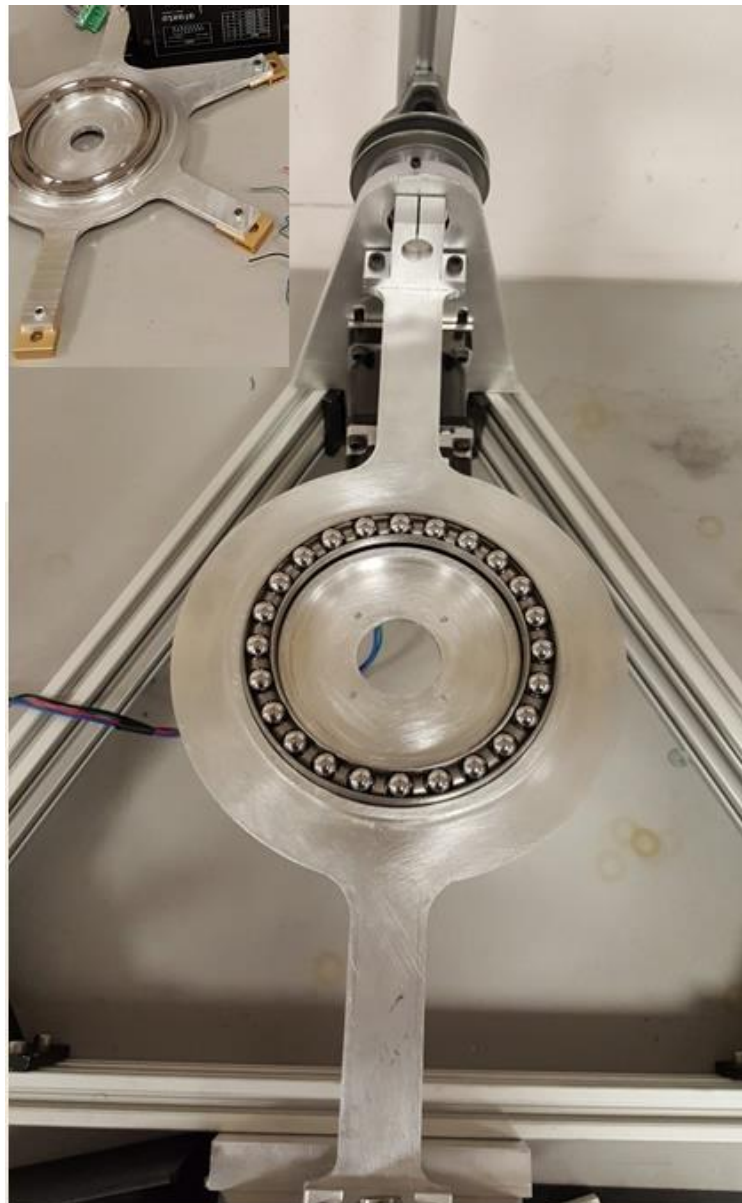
Manufactured table base, build support and complete design of the 5-axis 3D printer
